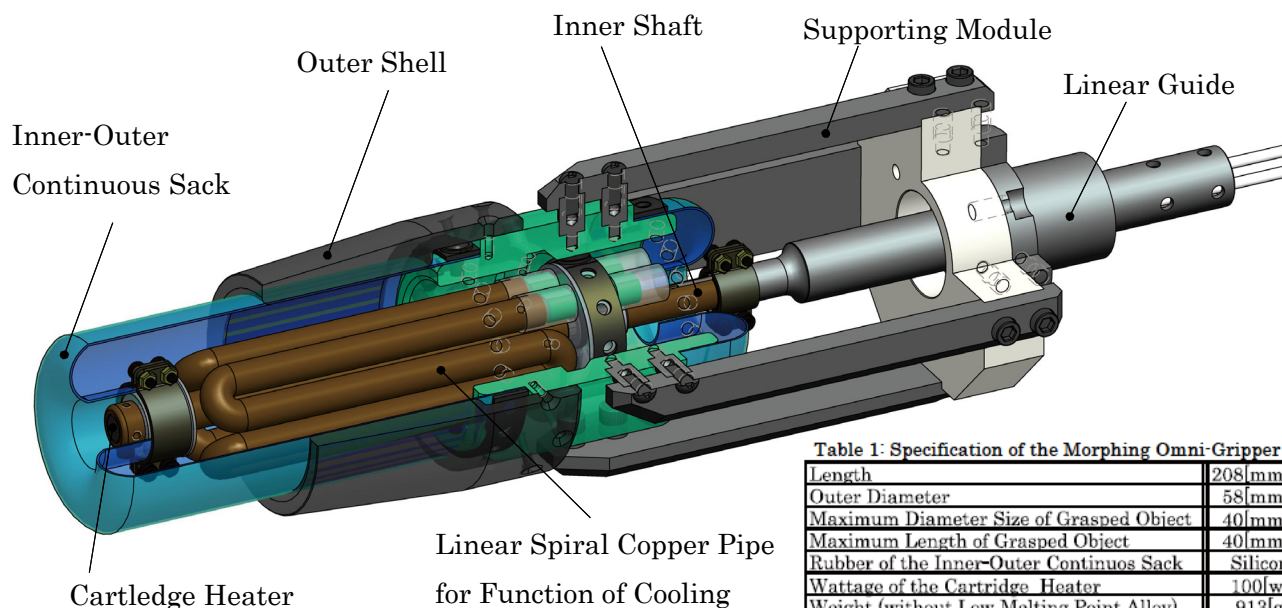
Prototype Mechanical Design of the Omni-Gripper
